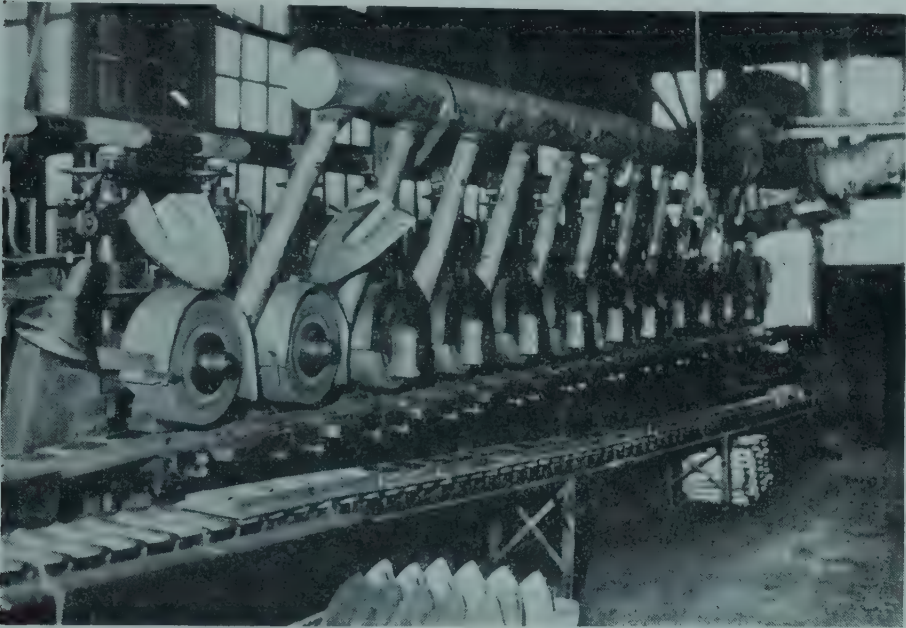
Polishing sole plates for electric irons on battery of machines using conveyor system. Polishing wheels vary from coarse for roughing to fine grit for finishing
